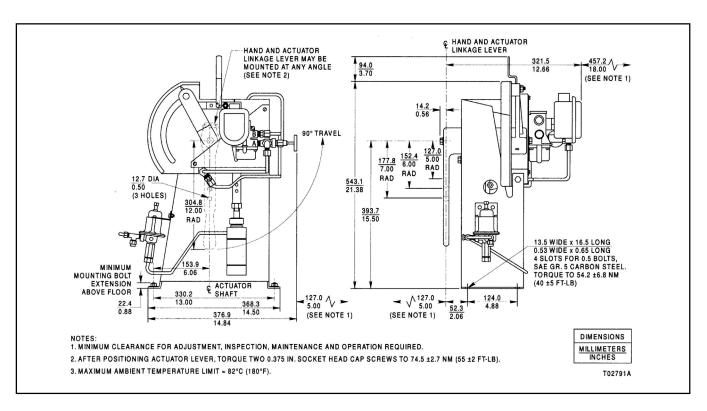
Type UP1 Actuator with Solenoid Valve and Air Failure Lock
